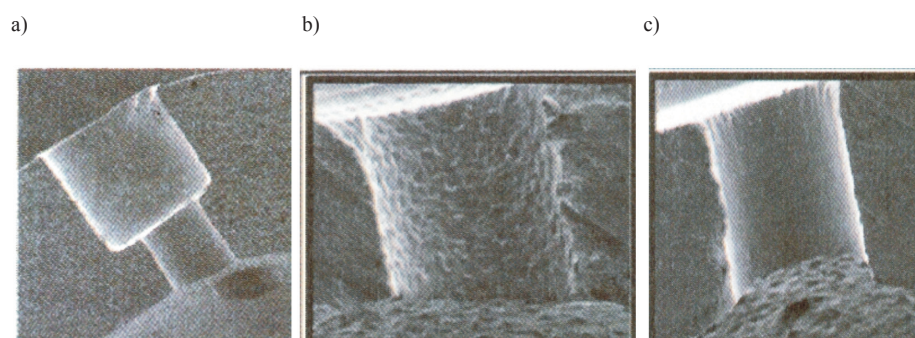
Cross-sections of the injector fuel outlet channels: a) cross-section of a typical injector outlet channel (GDI), b) channel made with the EDM method, c) channel made with the Femto-Second Laser Drilling Process [10]
